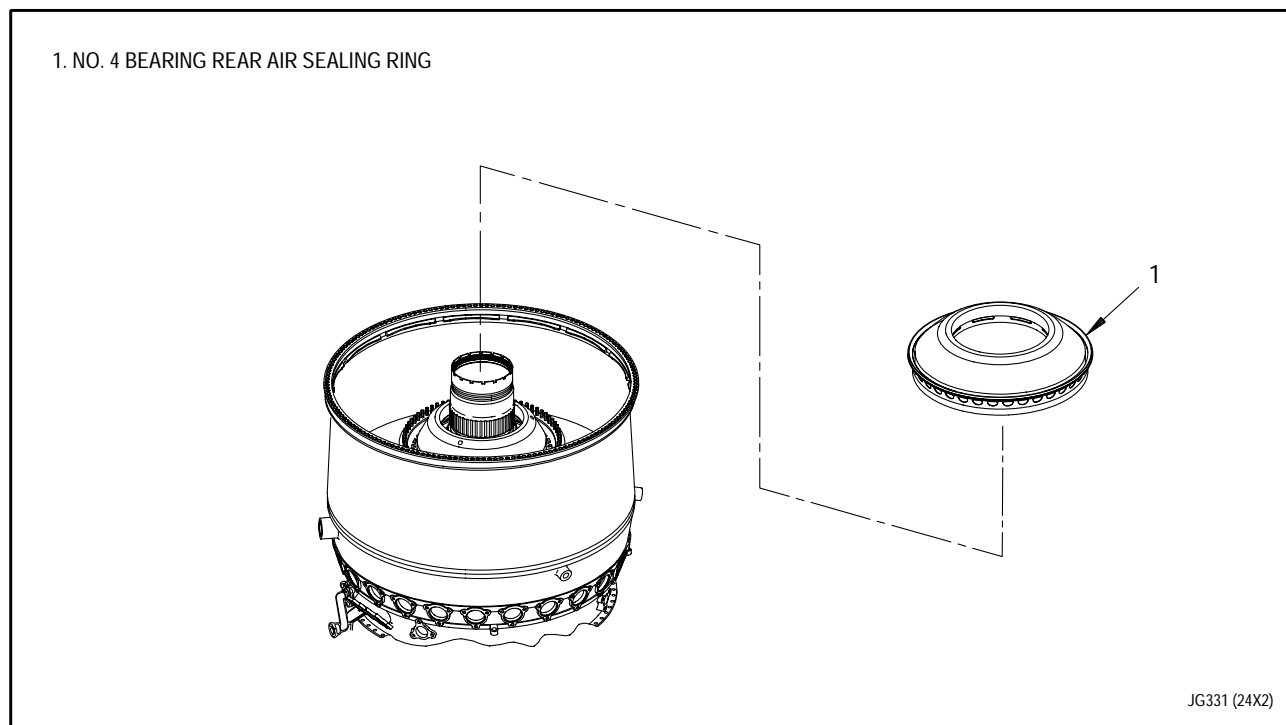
No. 4 Bearing Rear Air Seal Ring - Installation
